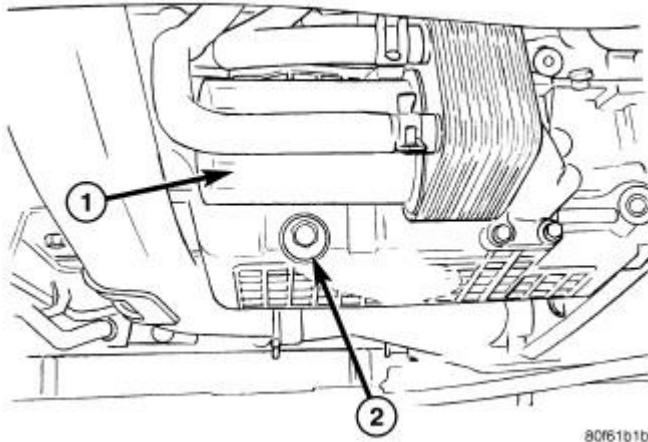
Oil Filter and Drain Plug - 2.4L Turbo
